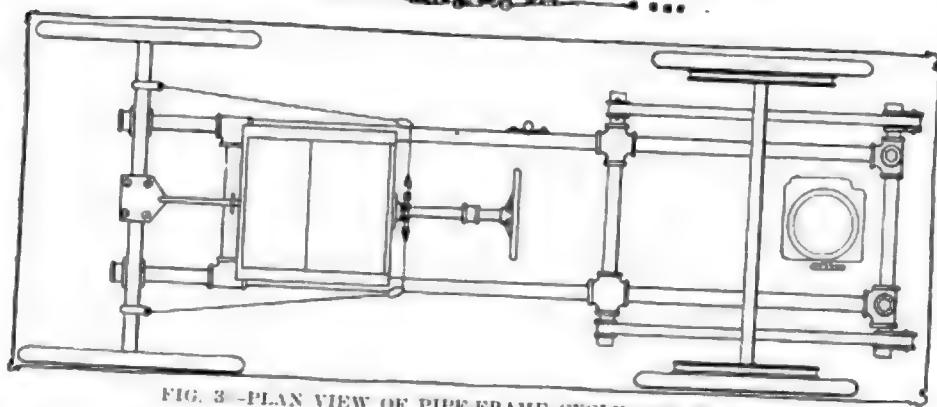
PLAN VIEW OF PIPE-FRAME CYCLE CAR CHASSIS
